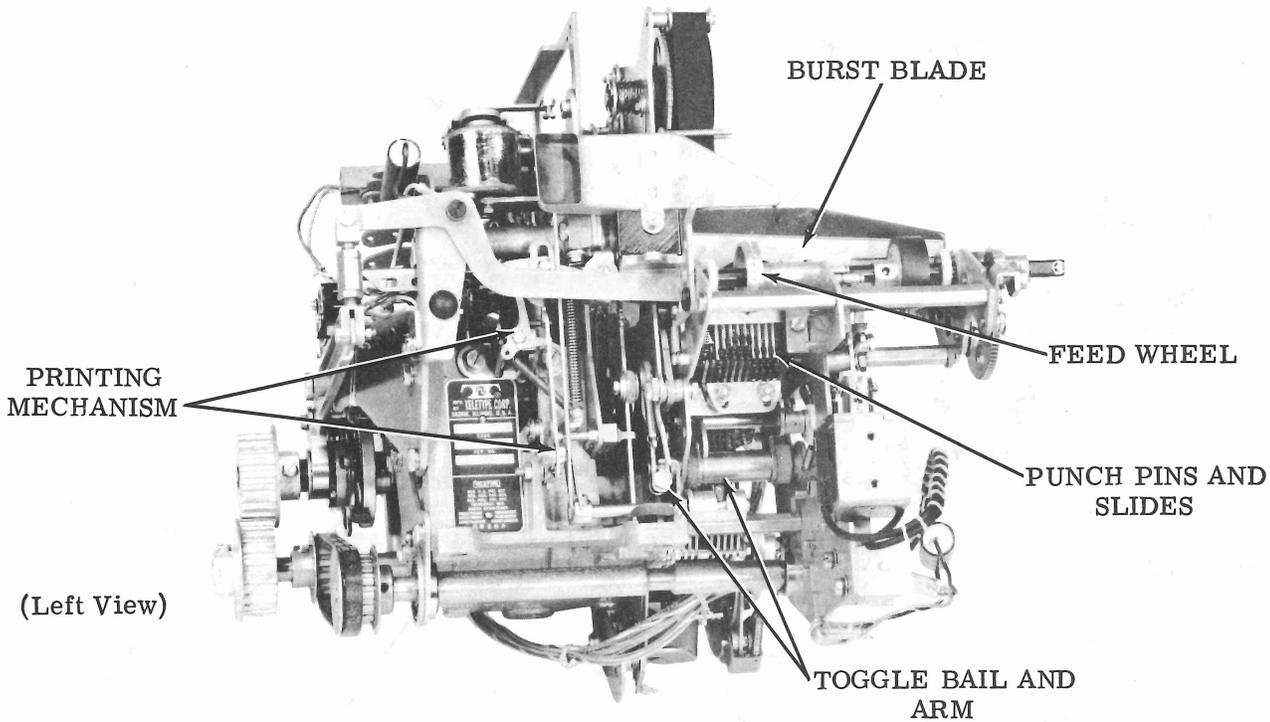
35 Edge Punched Card Typing Reperforator (Without Top Plates)
